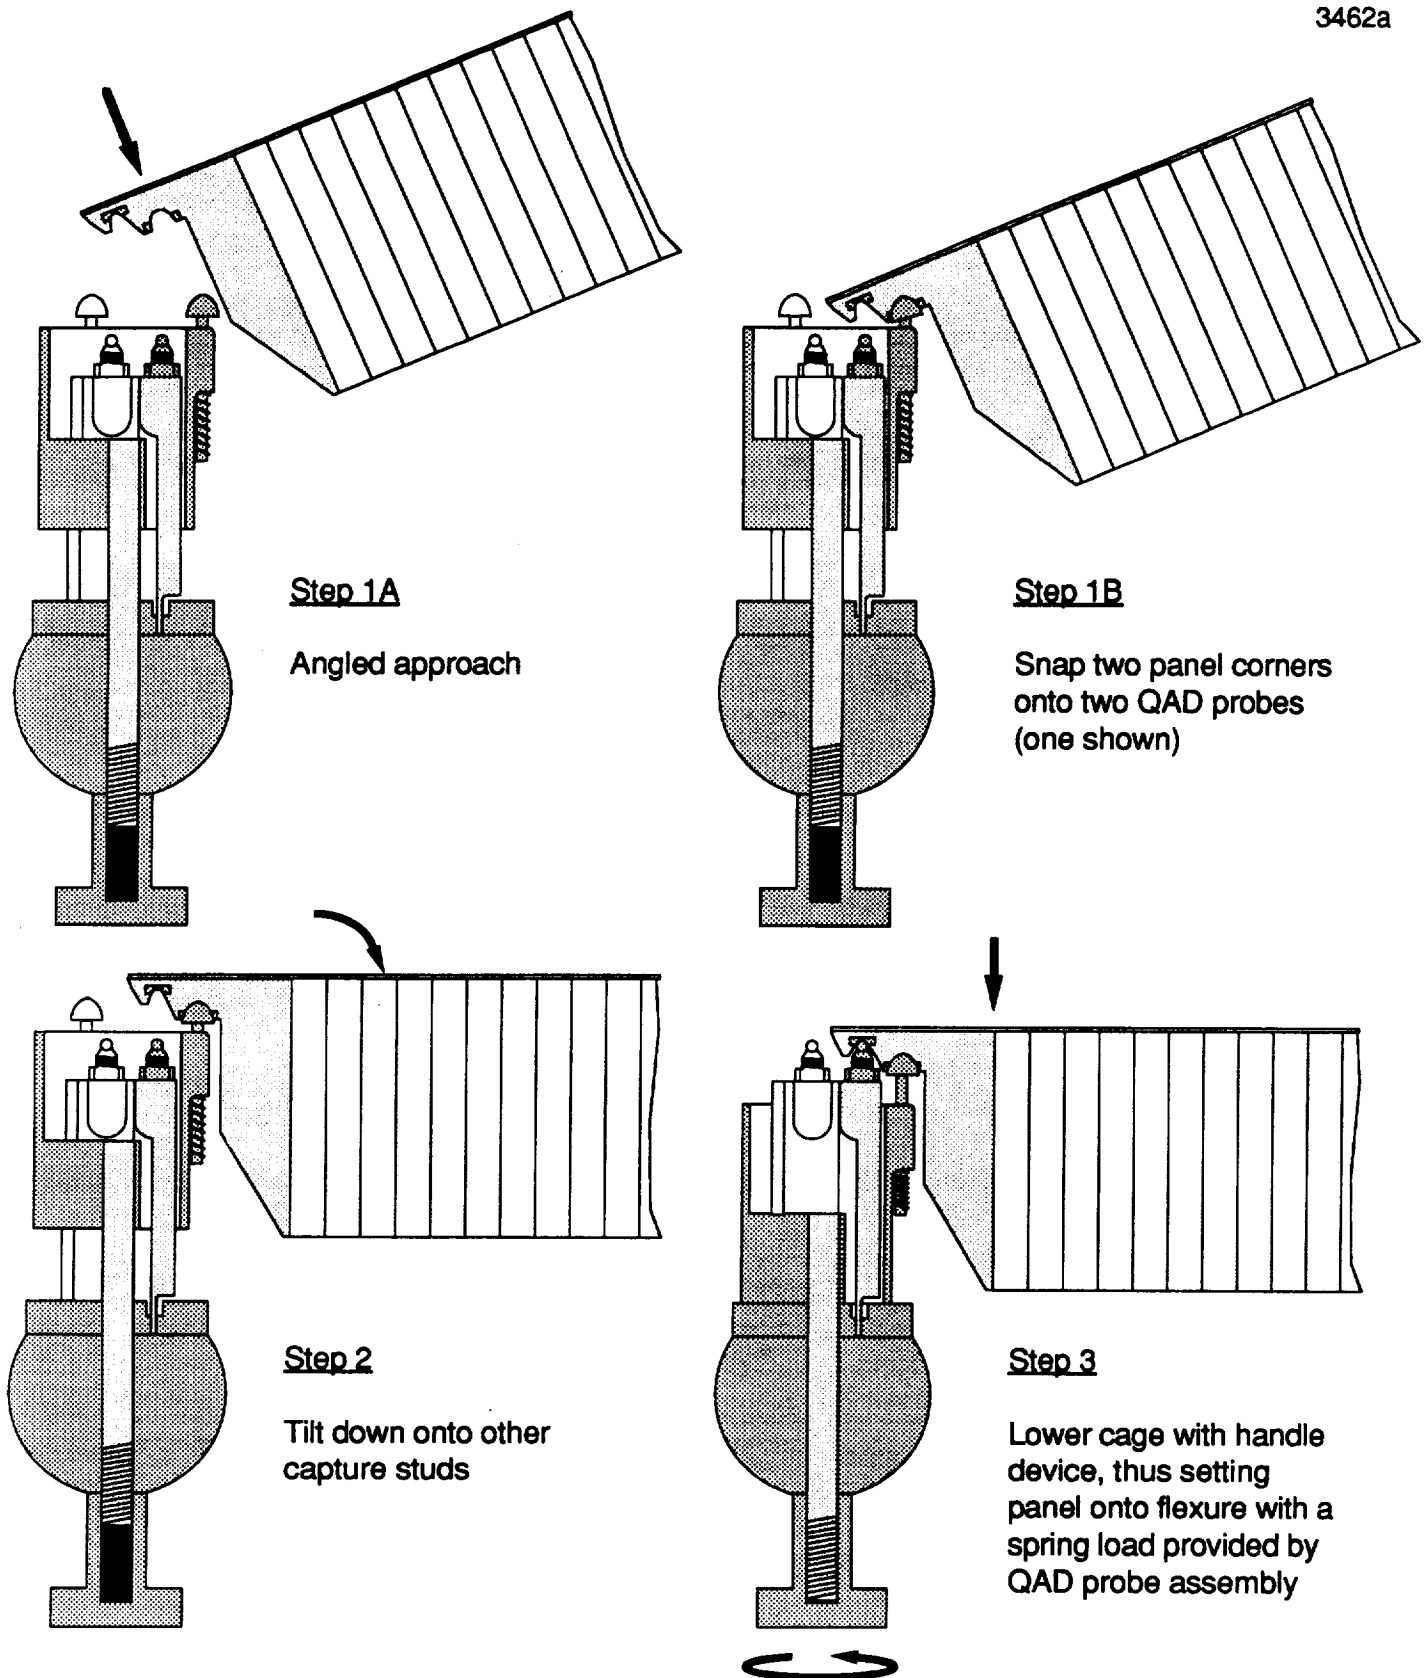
Three-Step Panel Attachment Sequence Using the PAD.
